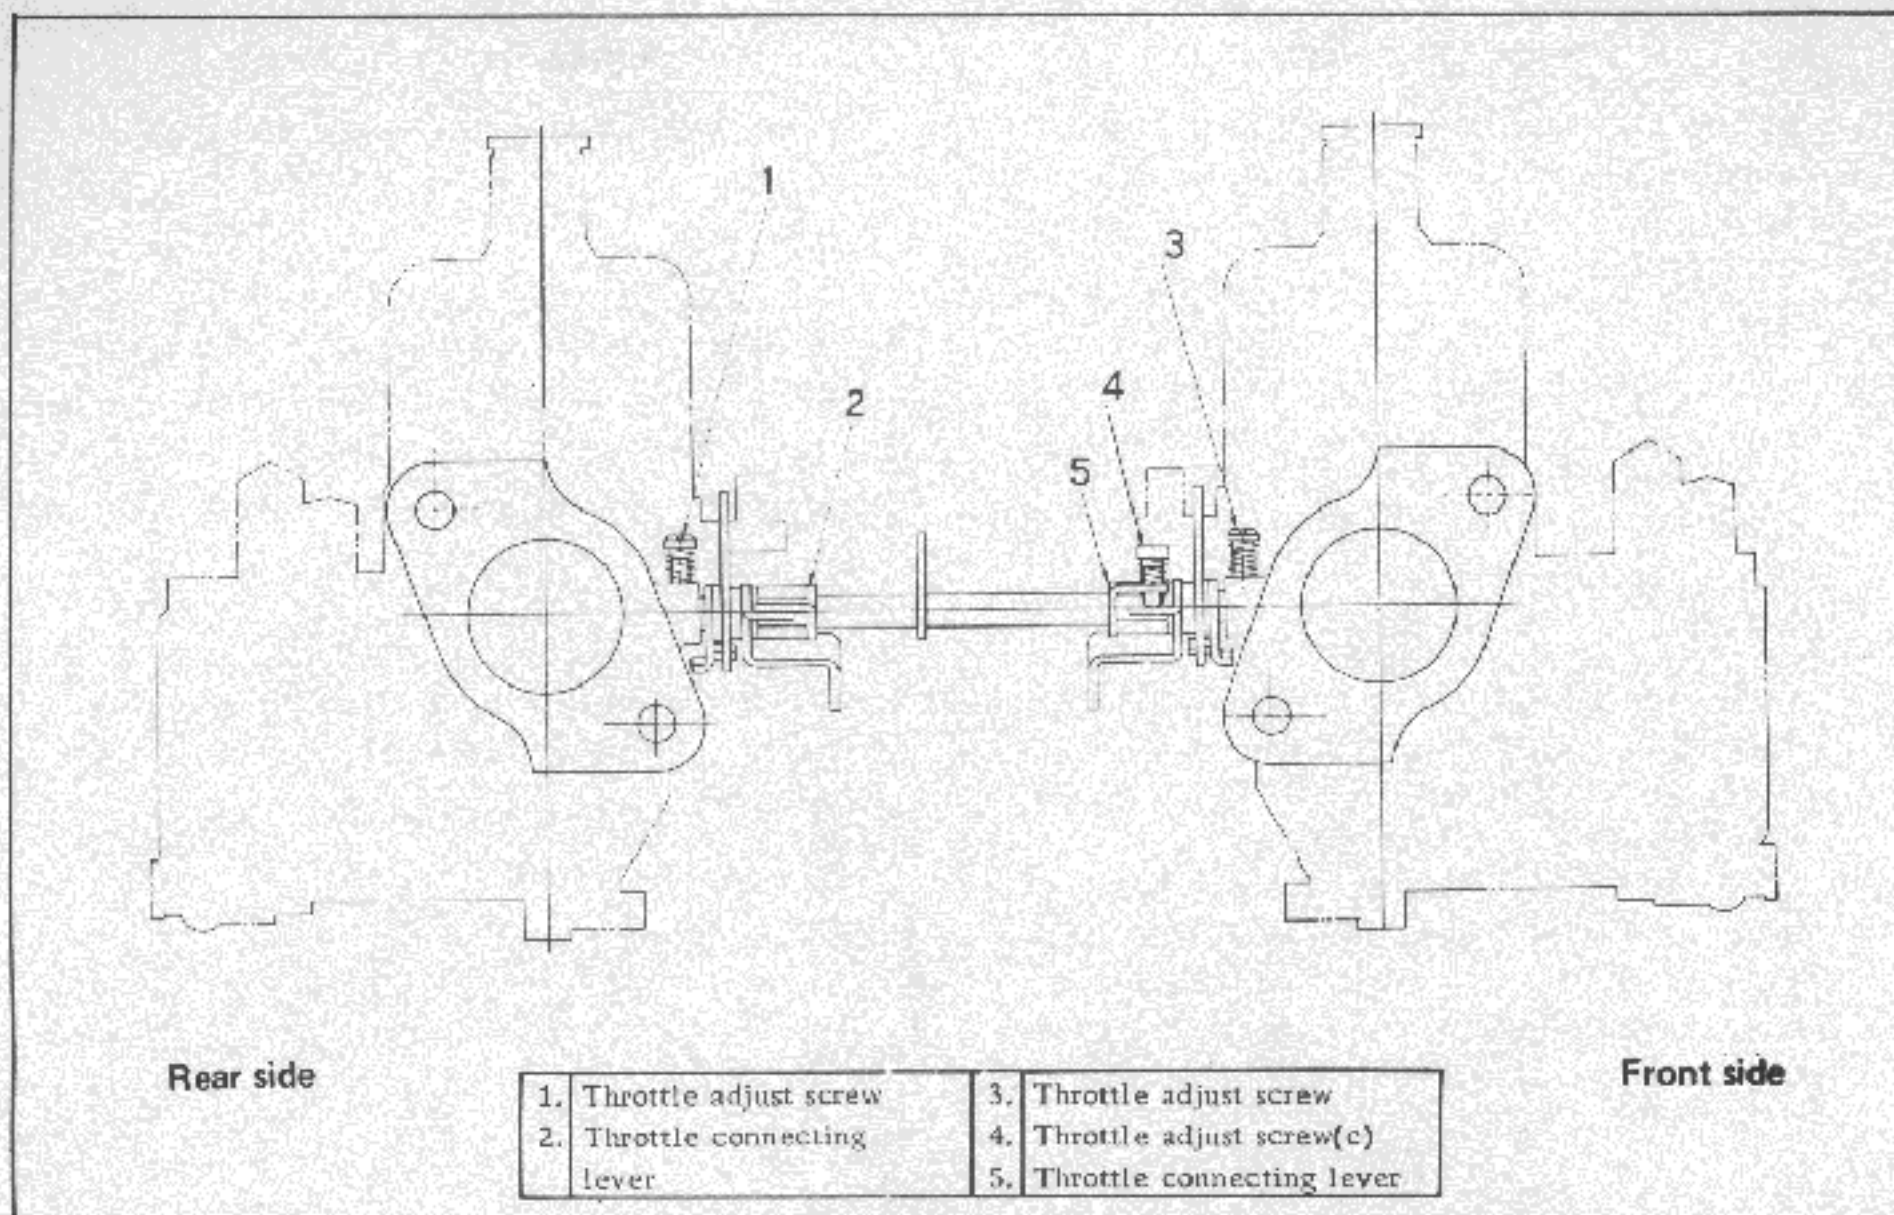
Throttle valve shaft interlock and throttle valve full closing adjustment
